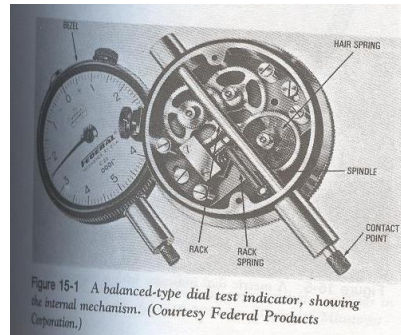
A balanced-type dial test indicator, showing the internal mechanism. (Courtesy Federal Products Corporation.)
